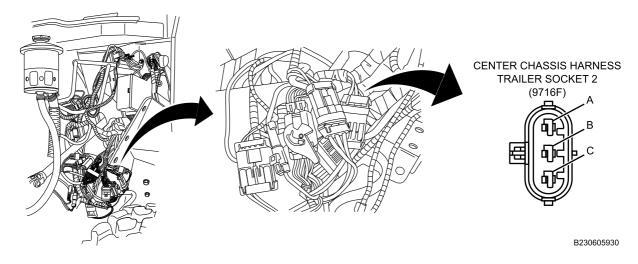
Engine Compartment Under Air Cleaner Assembly.
